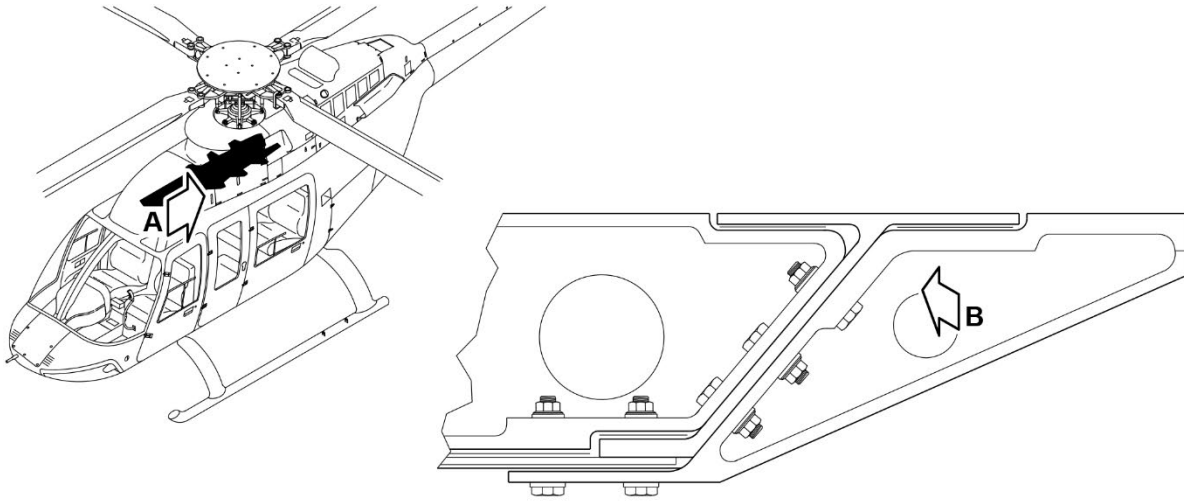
Roof beam potential at fuselage STA 113.97, 127.31, 140.65 and 145.40 (Sheet 2 of 2)
